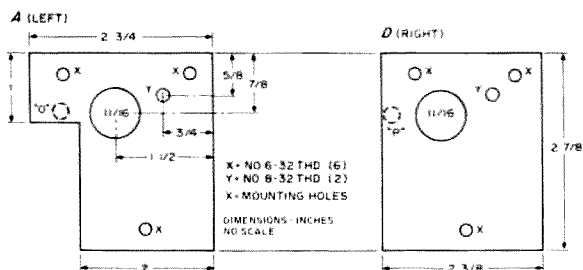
Paper feed supports (3/8" plexiglas). Drill and tap each piece for 8/32 1/4" screw, 3/4" from forward edge, 5/8" from top. Drill 11/16" hole for ball bearing, on each piece 1 1/2" from forward edge, 7/8" from top. O and P: 3/16" diameter holes to a depth of 3/16" on inner surface of each piece, 7/8" from top, 2 1/4" from forward edge, to retain 3/16" smoothing and aligning rod (brass, 3/16" x 12 1/4").
